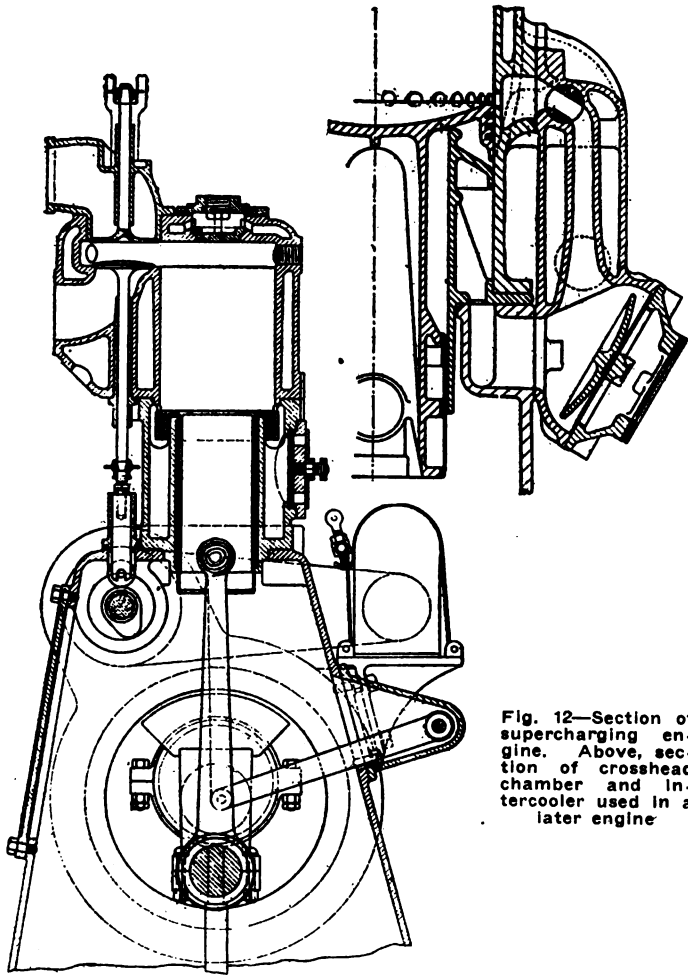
Section of supercharging engine. Above, section of crosshead chamber and intercooler used in a later engine
